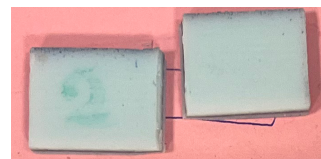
Sample 2 with $c/t = 0.1$ after fracture.
